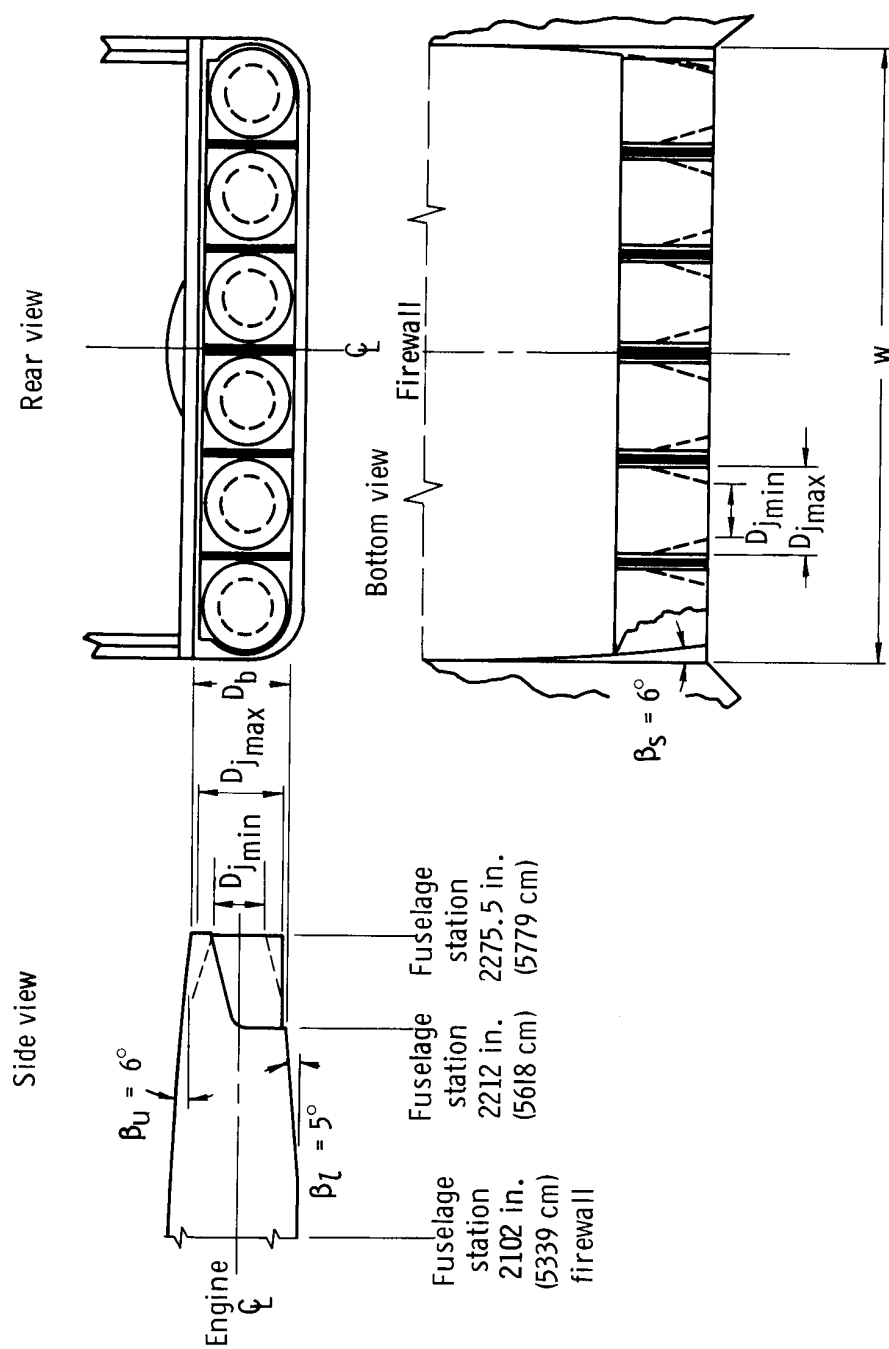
Three-view drawing of XB-70 afterbody showing pertinent dimensions
